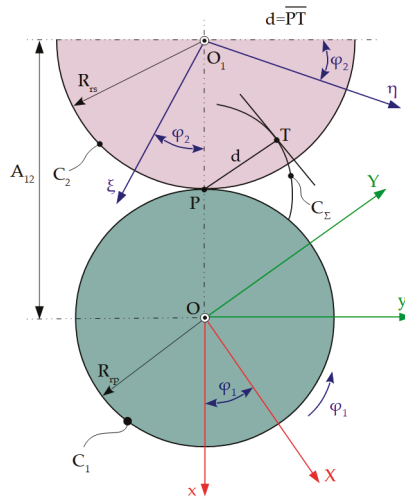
The minimum distance method applied at generating with the gear shaped cutter tool [2].
